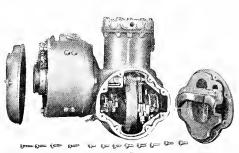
Type CP27 Air Compressor with Covers Removed.
